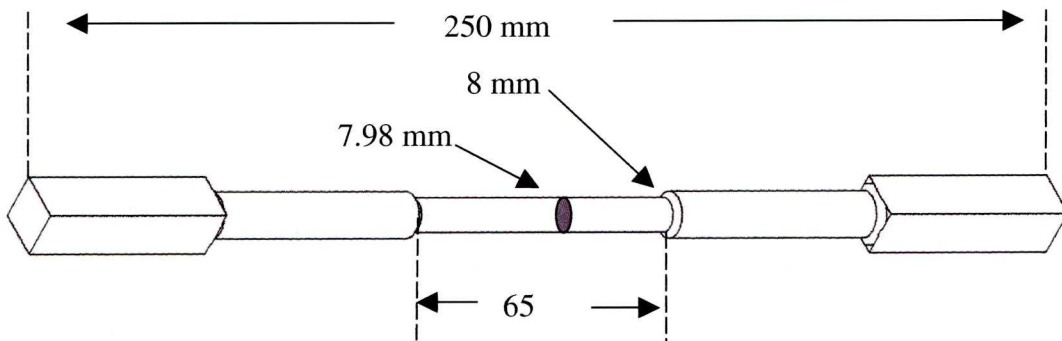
Geometry of the tensile test pieces with cylindrical gauge length and square ends
